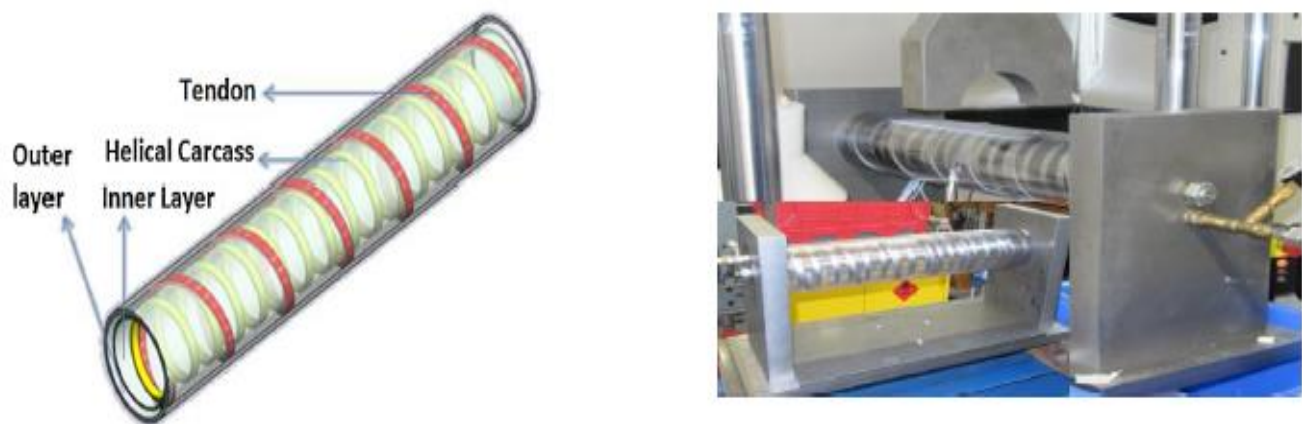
Assembly of prototype layers and specimen for bending test [30]
